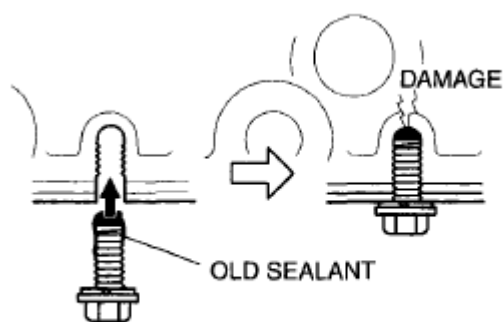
Identifying Engine Support Insulator Bracket And Bolt
